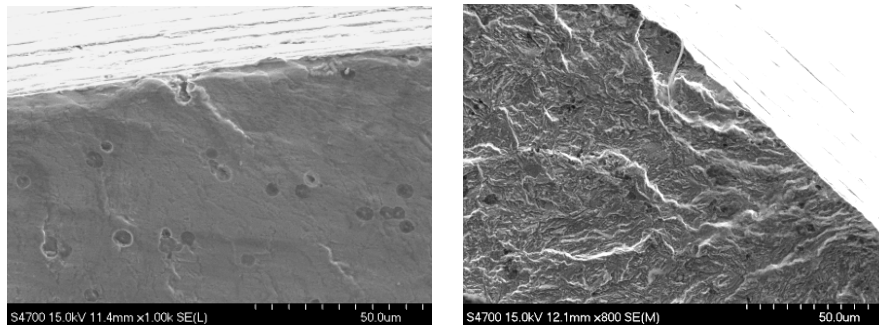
The fatigue crack initiating from surface defects (U2, 562MPa,  $5.4 \times 10^6$ , left; N48U2, 974MPa,  $6.46 \times 10^4$ , right)
